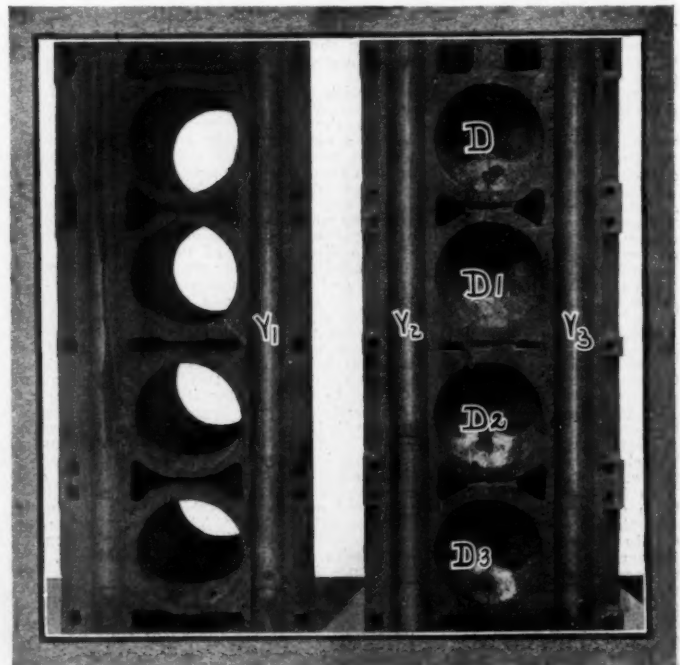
Two sectional views of the cylinder casting, also showing the valve holes
